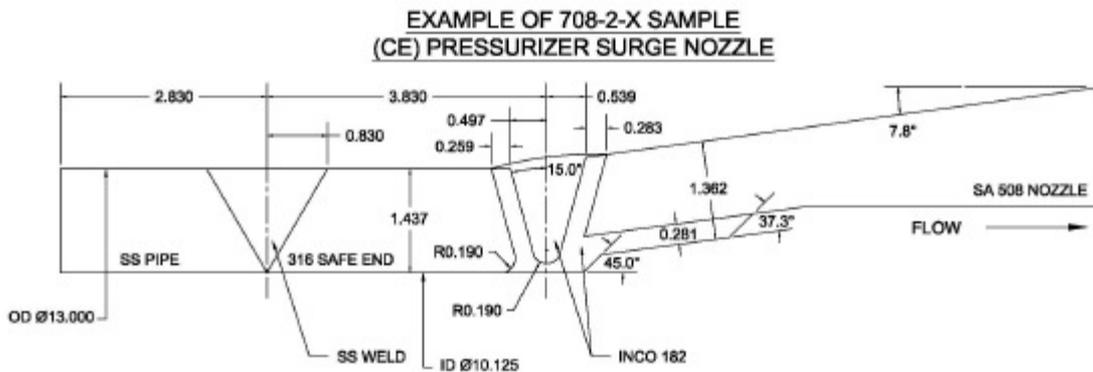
New PDI Dissimilar Metal Weld Configuration 708-2-X
